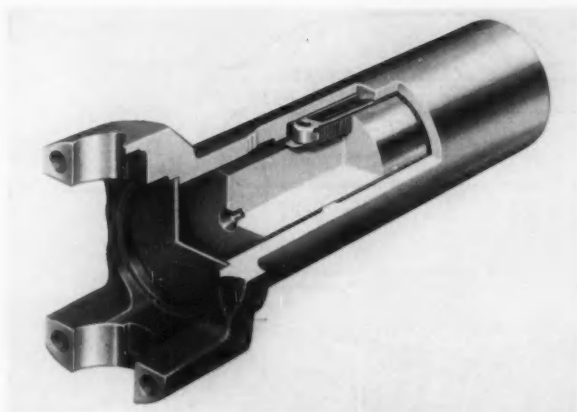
Recirculating roller bearing spline design. This design allows for changes in length of the driveline while transmitting torque. The lower friction of this spline limits road noise.
